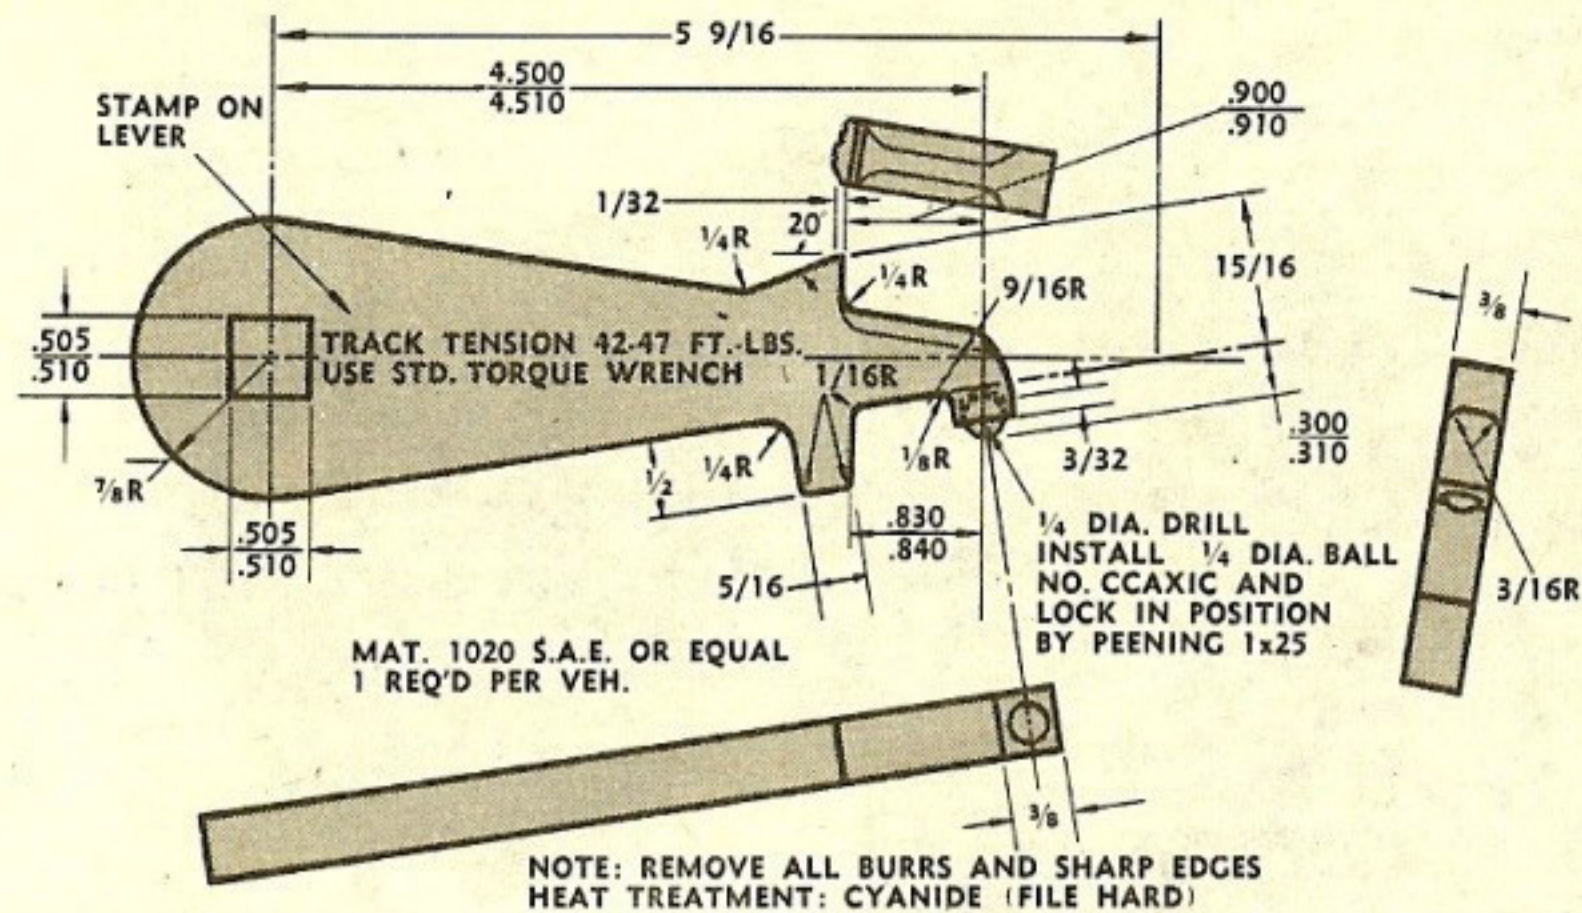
So you never get special tools, eh? Okay, here's the drawing—roll your own.
